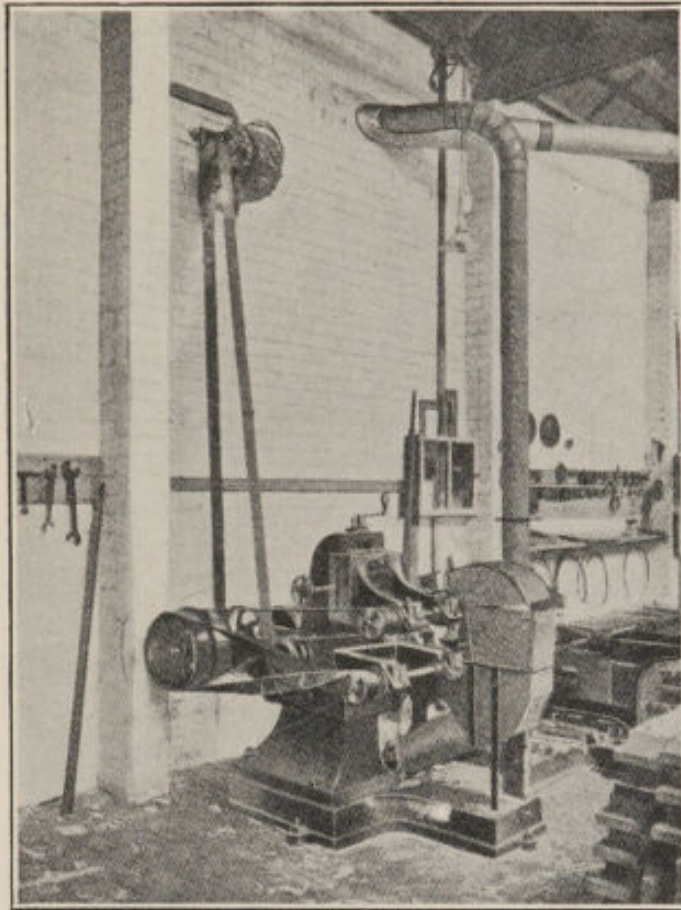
Exhausting Wood Chips from Tenoning Machine. The sections of the Hood are hinged to permit of ready access to Cutters. Guard for belts not shown. (Messrs. Sturtevant Engineering Co., Ltd., London.)
